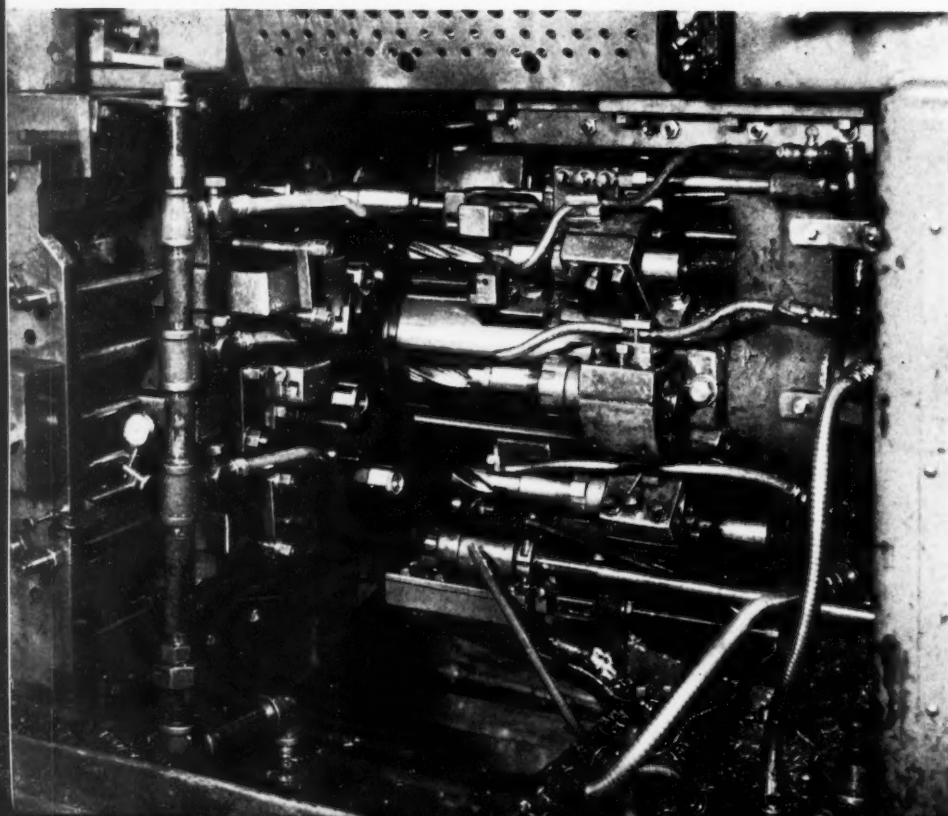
Machine Employed for Turning Full-length Bars of Steel Stock before They Go to Eight-spindle Conomatics to be Machined into 40-millimeter Shells
